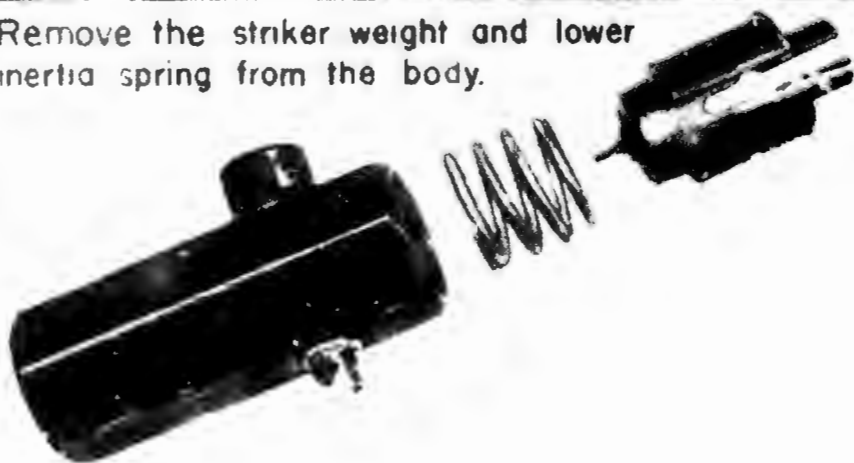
Fourth steps in disassembly of DP R Link, Mark II or
